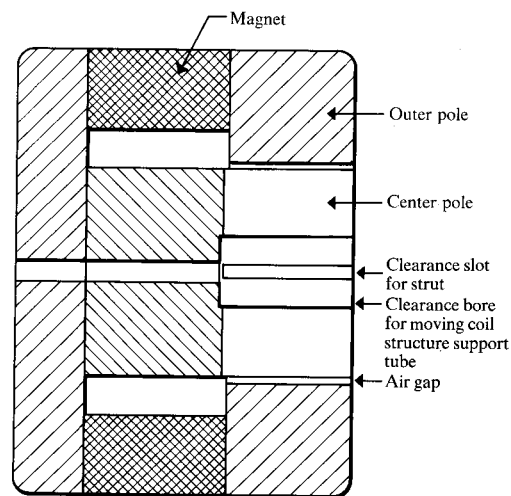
Initial cylindrical design of moving-coil linear actuator.
